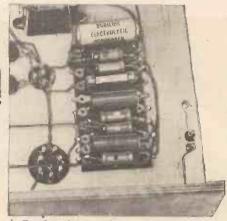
An example of component grouping as typified in the under chassis layout of the A.C. Hall-Mark Four.
